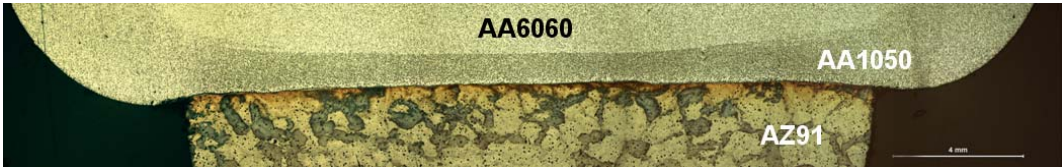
Macrograph of a dissimilar rotational friction weld between an AA6082 and an AZ91D-T6 stud. The presence of a pure aluminium AA1050 interlayer was also investigated ^[128].
